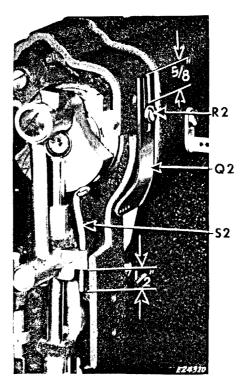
Adjustments for Setting Needle Thread Take-Up
